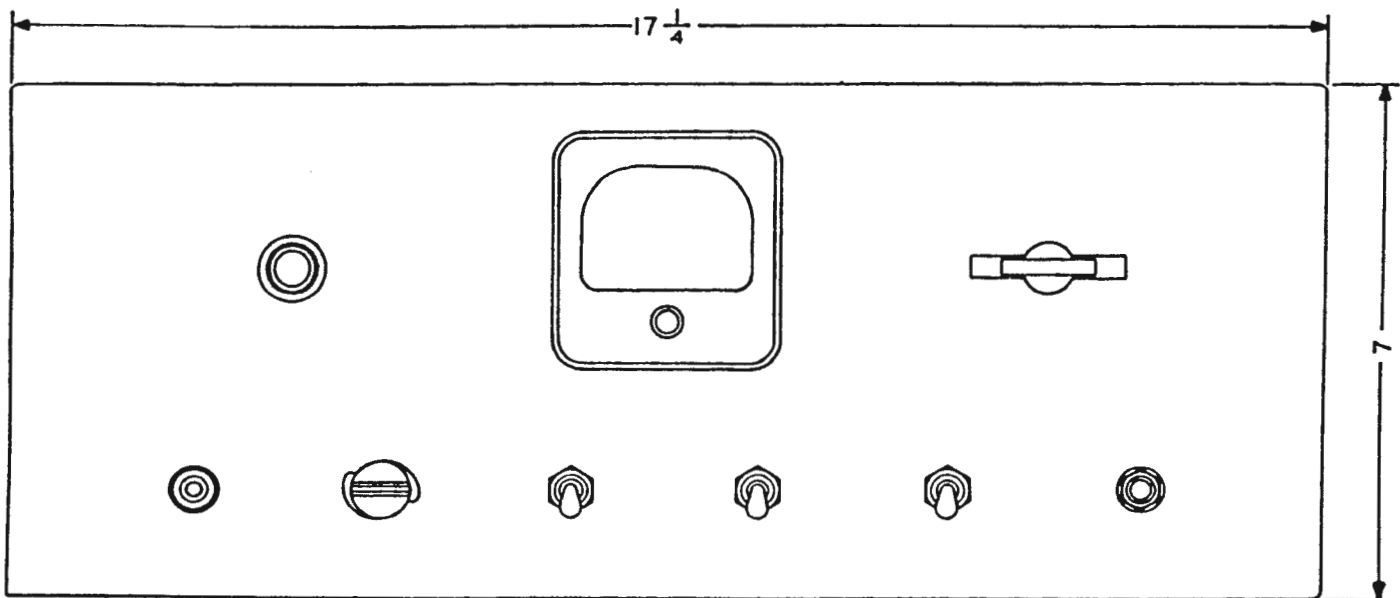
Type 177L Remote Control Unit Outline and Mounting Dimensions
